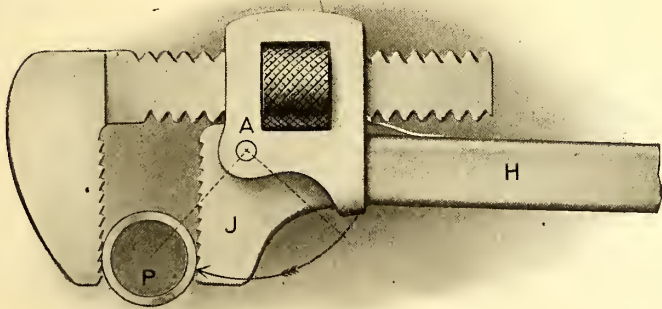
COMMON TYPE OF PIPE WRENCH WHICH EXERTS A CRUSHING STRAIN.
